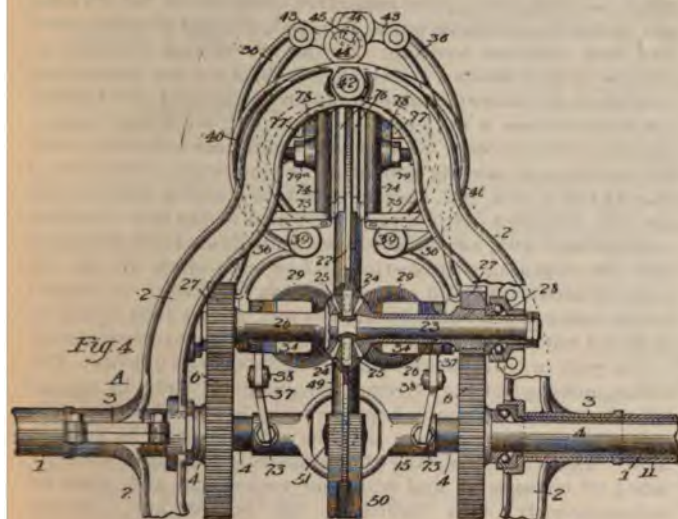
shows a plan view of the transmission mechanism and running gear. The reaches are connected to the front axle, and to the tubes 1 inclosing the rear driving-axes, by bearing T's 11 and 14, which are loose on the members which they connect, and on which they are prevented from slipping lengthwise by suitable collars, as 12, 13. The frame is thus made flexible. The driving-axle 4 (Fig. 4) is divided into two parts, and the inner end of each carries a gear 6 6, which gears are driven by pinions 27 on the ends of a short differential shaft 23. A suitable yoke 2 connects the inner ends of the tubes 1 1.
